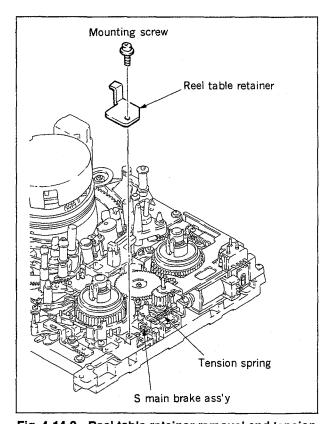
Reel table retainer removal and tension spring removal
